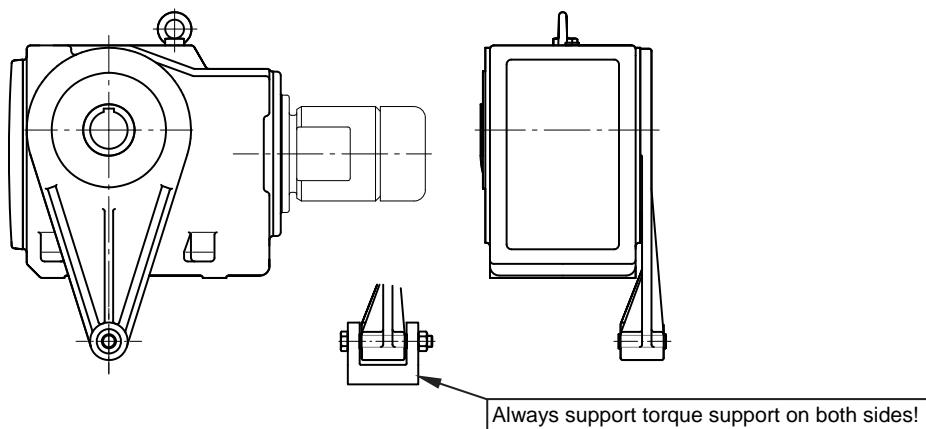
Attaching the torque support on bevel gear and worm gear units
